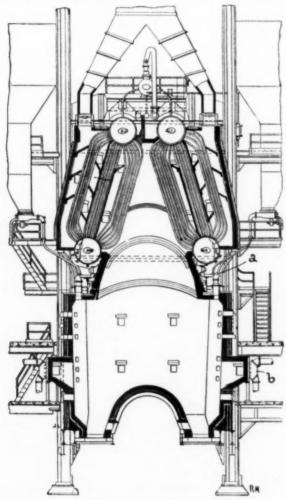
Boiler Installation at the River Rouge Plant of the Ford Motor Co.
